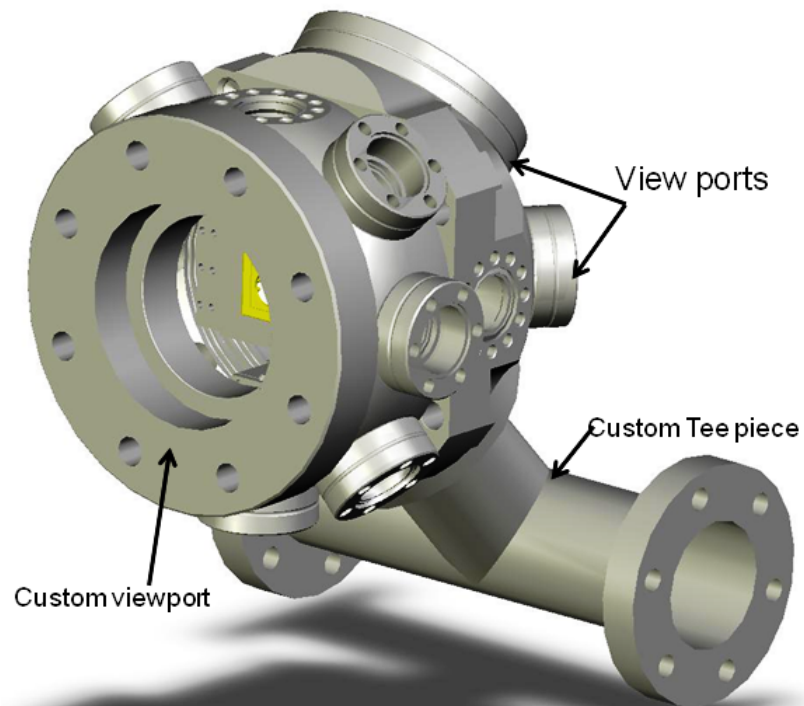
Vacuum chamber assembly connected with custom made T-piece.
